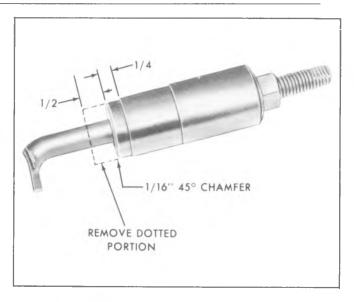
B-98--Revised Shift Tube Removing Tool J-22551
